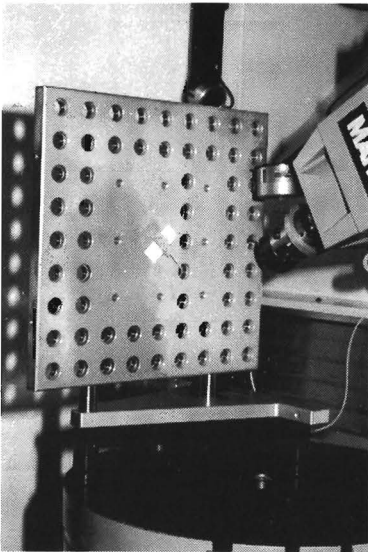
A hole plate measurement carried out in the XZ-plane on the milling machine.
